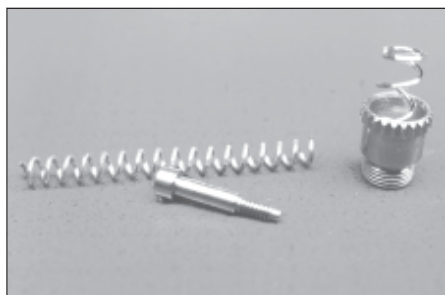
The unused serrated tube and spring next to the push screw and spring from a large diameter spring bar
